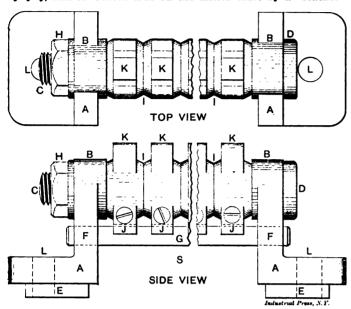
Fixture Use i in Dovetailing Piece shown in Fig. 11.
